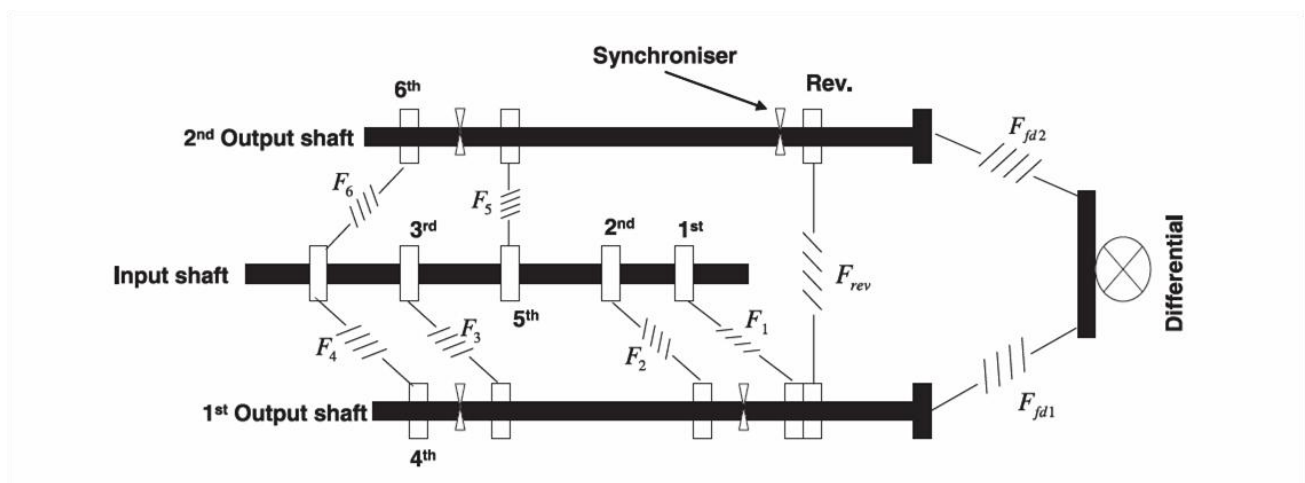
Front wheel drive, 6 speed + reverse gearbox under investigation
